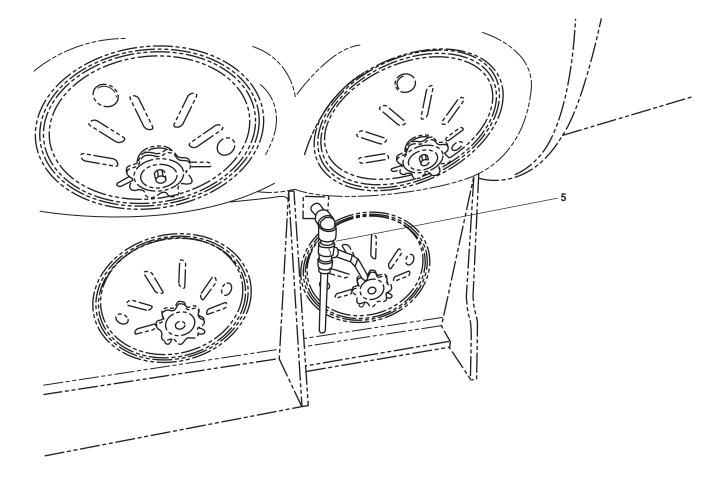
Engine Exhaust System (Sheet 2 of 3)
